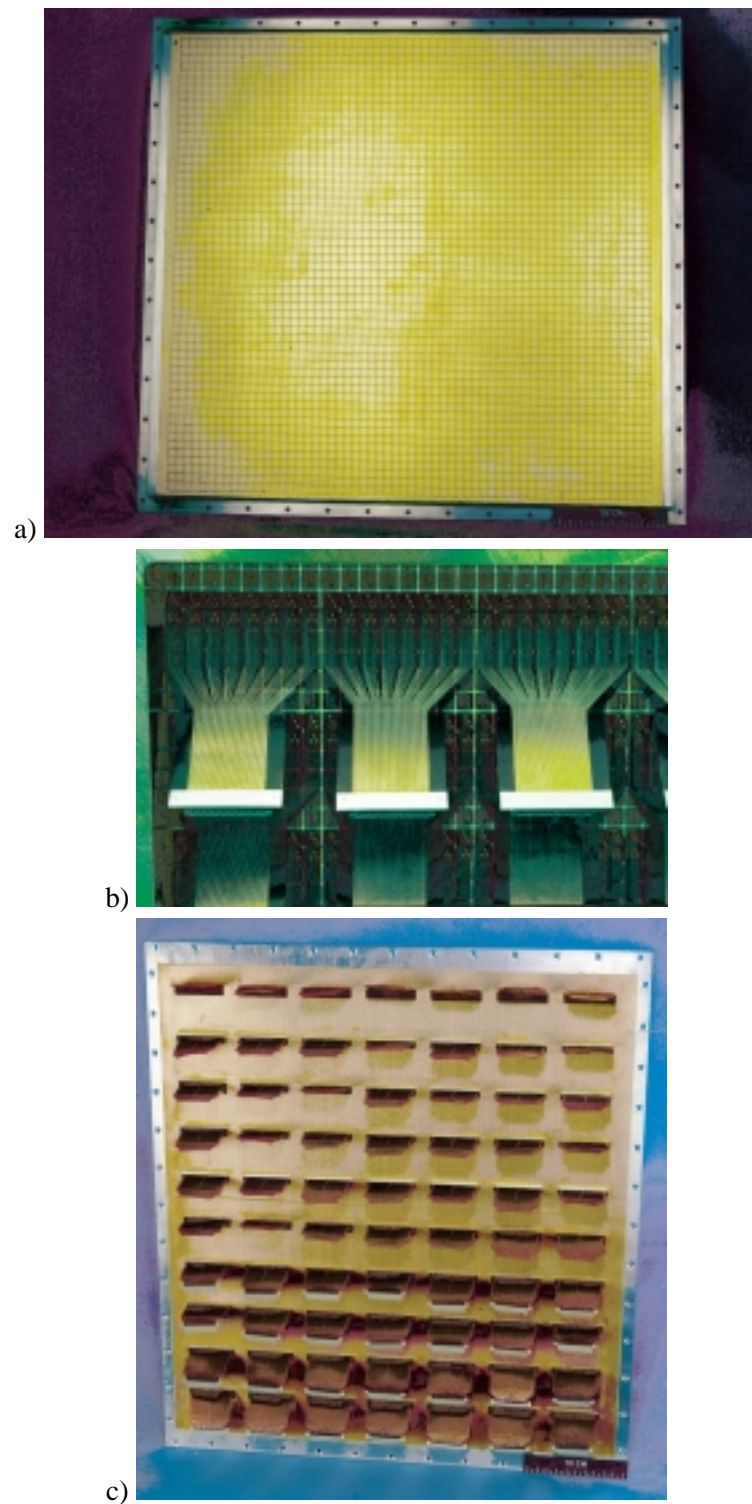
a) Pad panel viewed from the side of the pad PCB. The size is of 60×56 pads of $8 \times 8 \text{ mm}^2$ each. One sees the aluminium frame used to tighten the pad panel on the detector.
